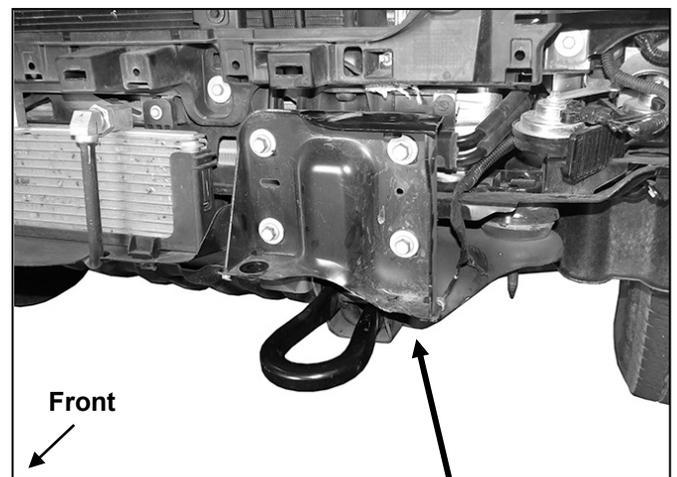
Remove bumper supports attaching outer end of bumper to frame (arrow)
